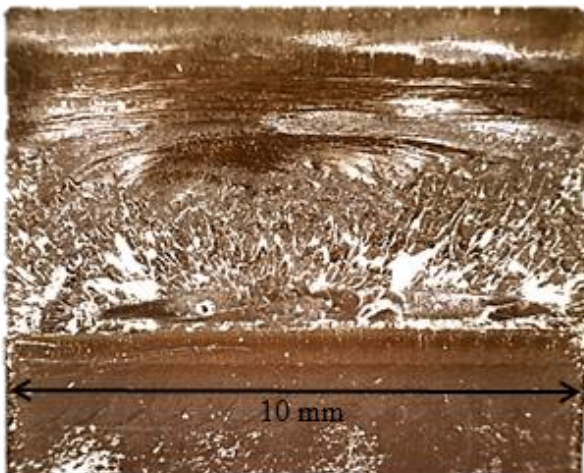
Fracture surfaces of standard Charpy Impact samples.
